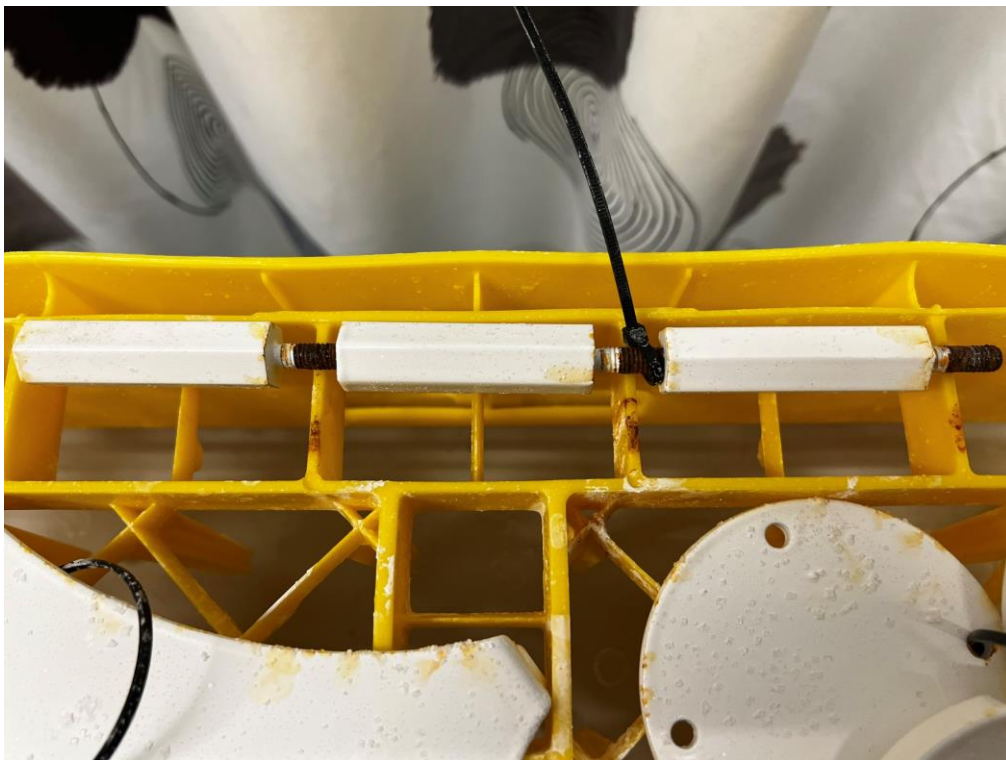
Visual inspection. (Hex standoff P/N: 20006) corrosion along edges and on screw thread.
